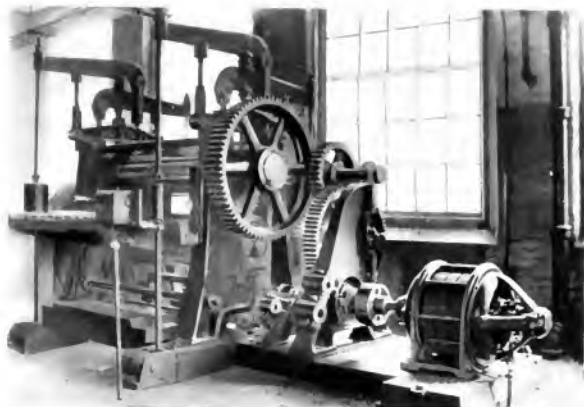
15-h p., 600-r.p.m., 550-volt Phase-wound Reversing Induction Motor Driving Plater
